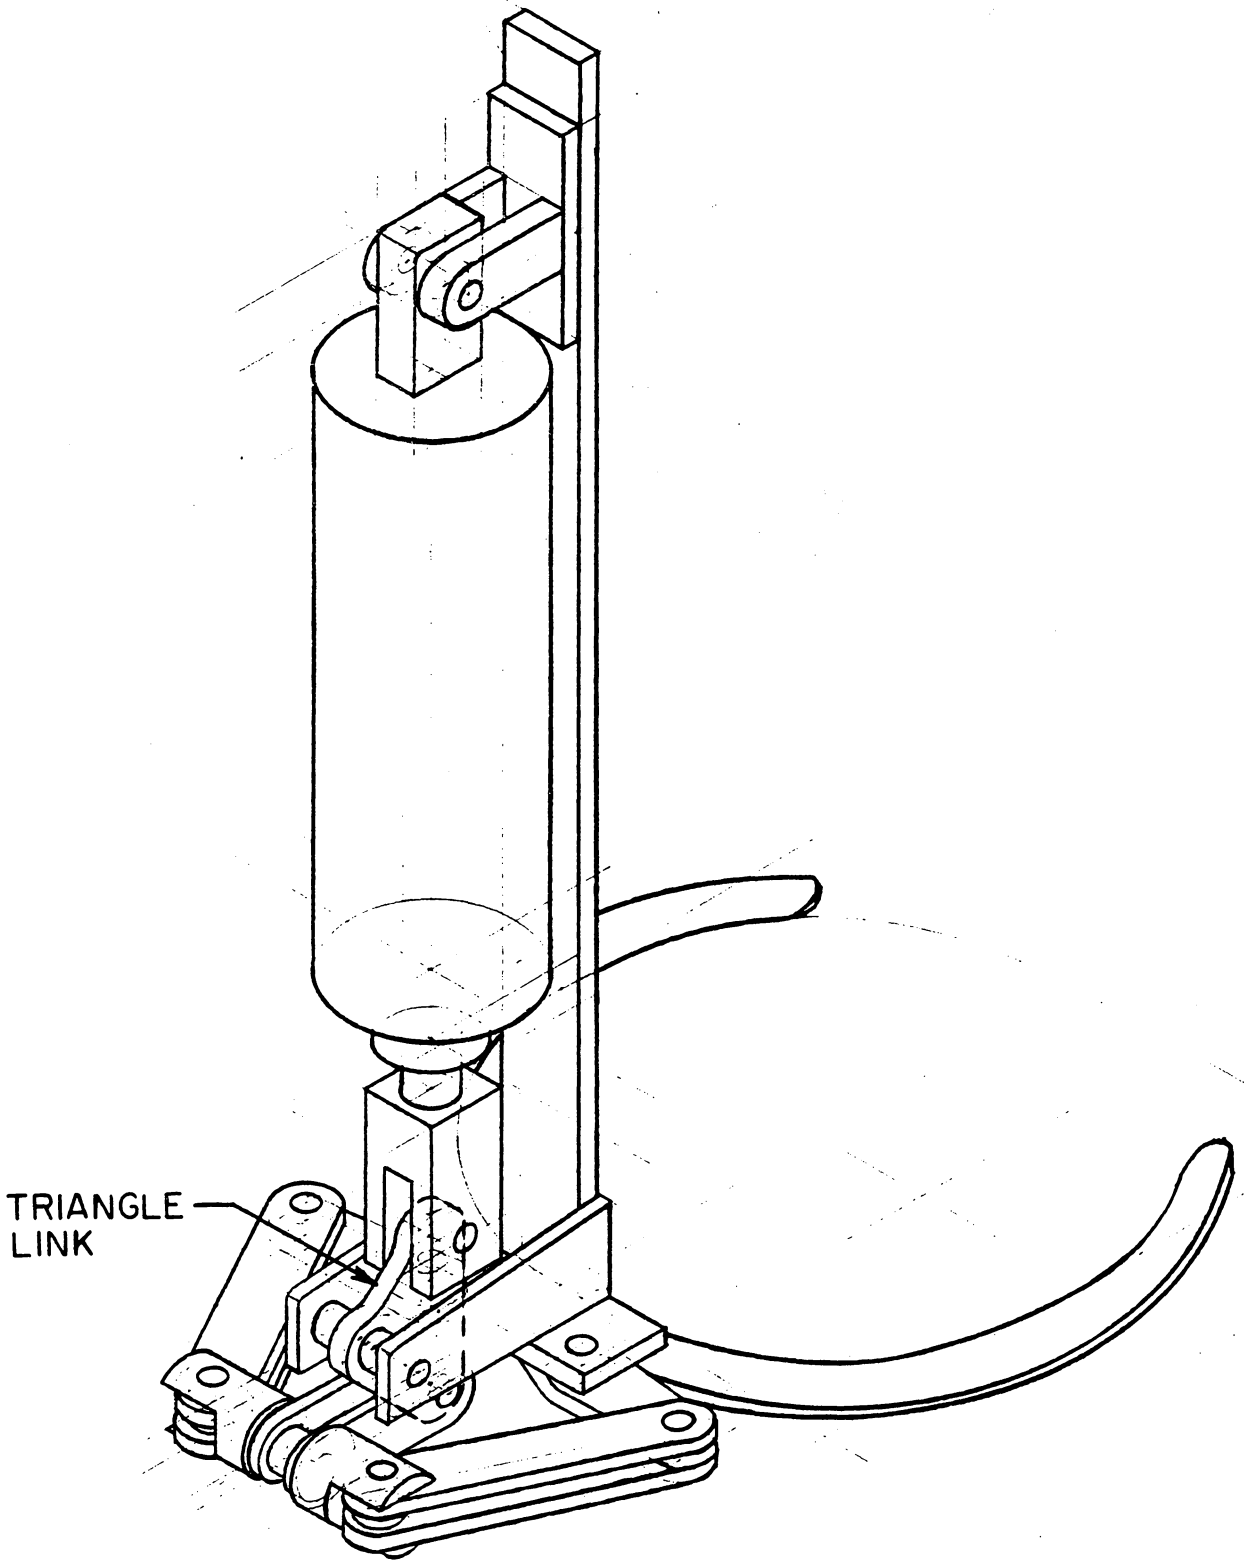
Isometric view of the cutting mechanism with the cylinder retracted.
